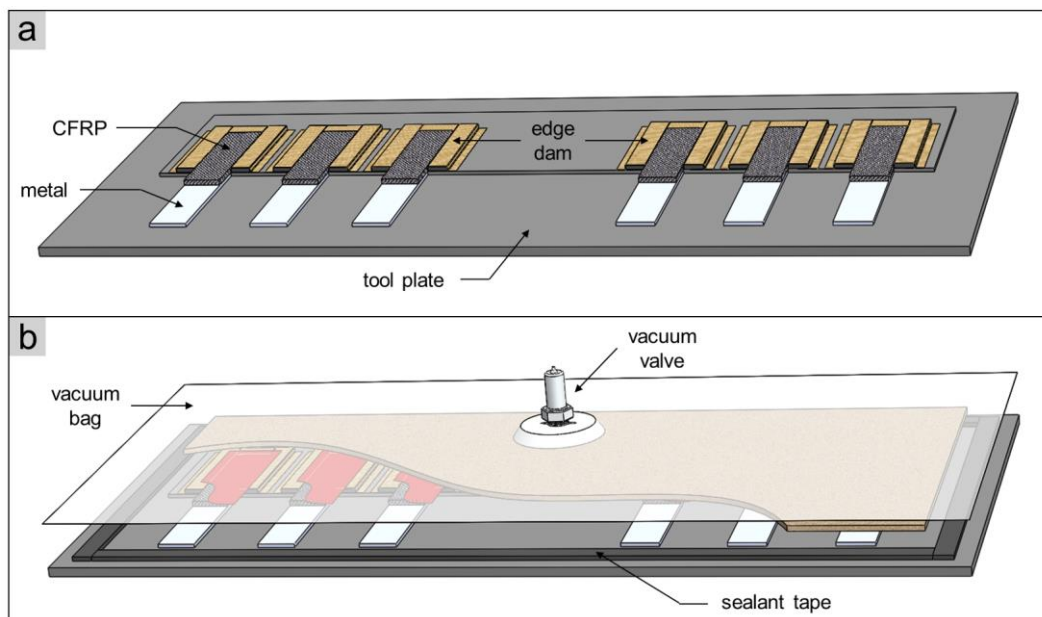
Vacuum bag assembly for lap shear laminate manufacture. (a) The tool plate includes a step to ensure that the composite lays flat as it cures. Each lap shear sample with edge dam bordering the composite is shown. (b) Complete vacuum bag assembly including release film (red) and breather (brown) in between the samples and vacuum bag.
